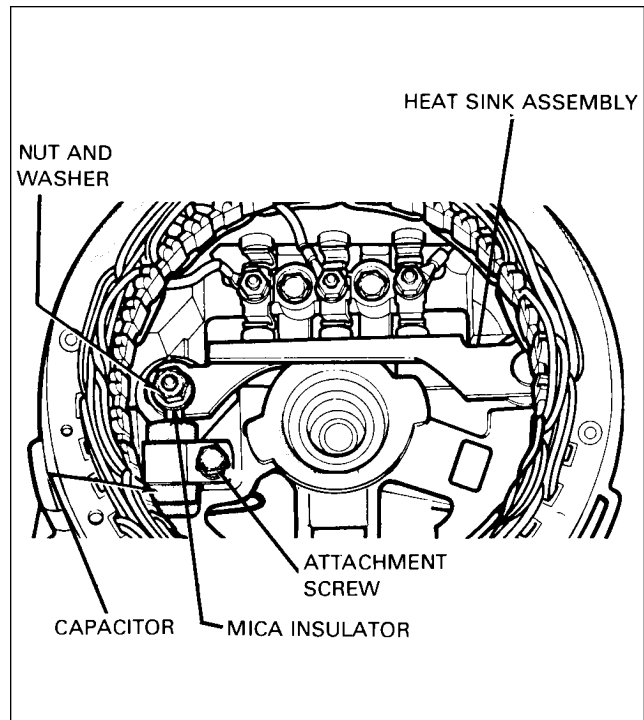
Rectifier End Shield Assembly Assembly Removal
